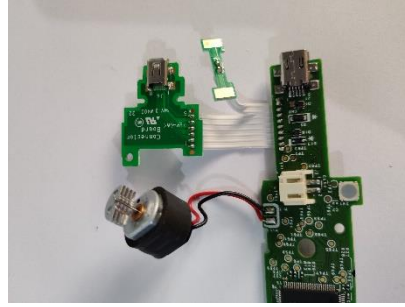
Two daughterboards and Vibration motor assembled to the motherboard
